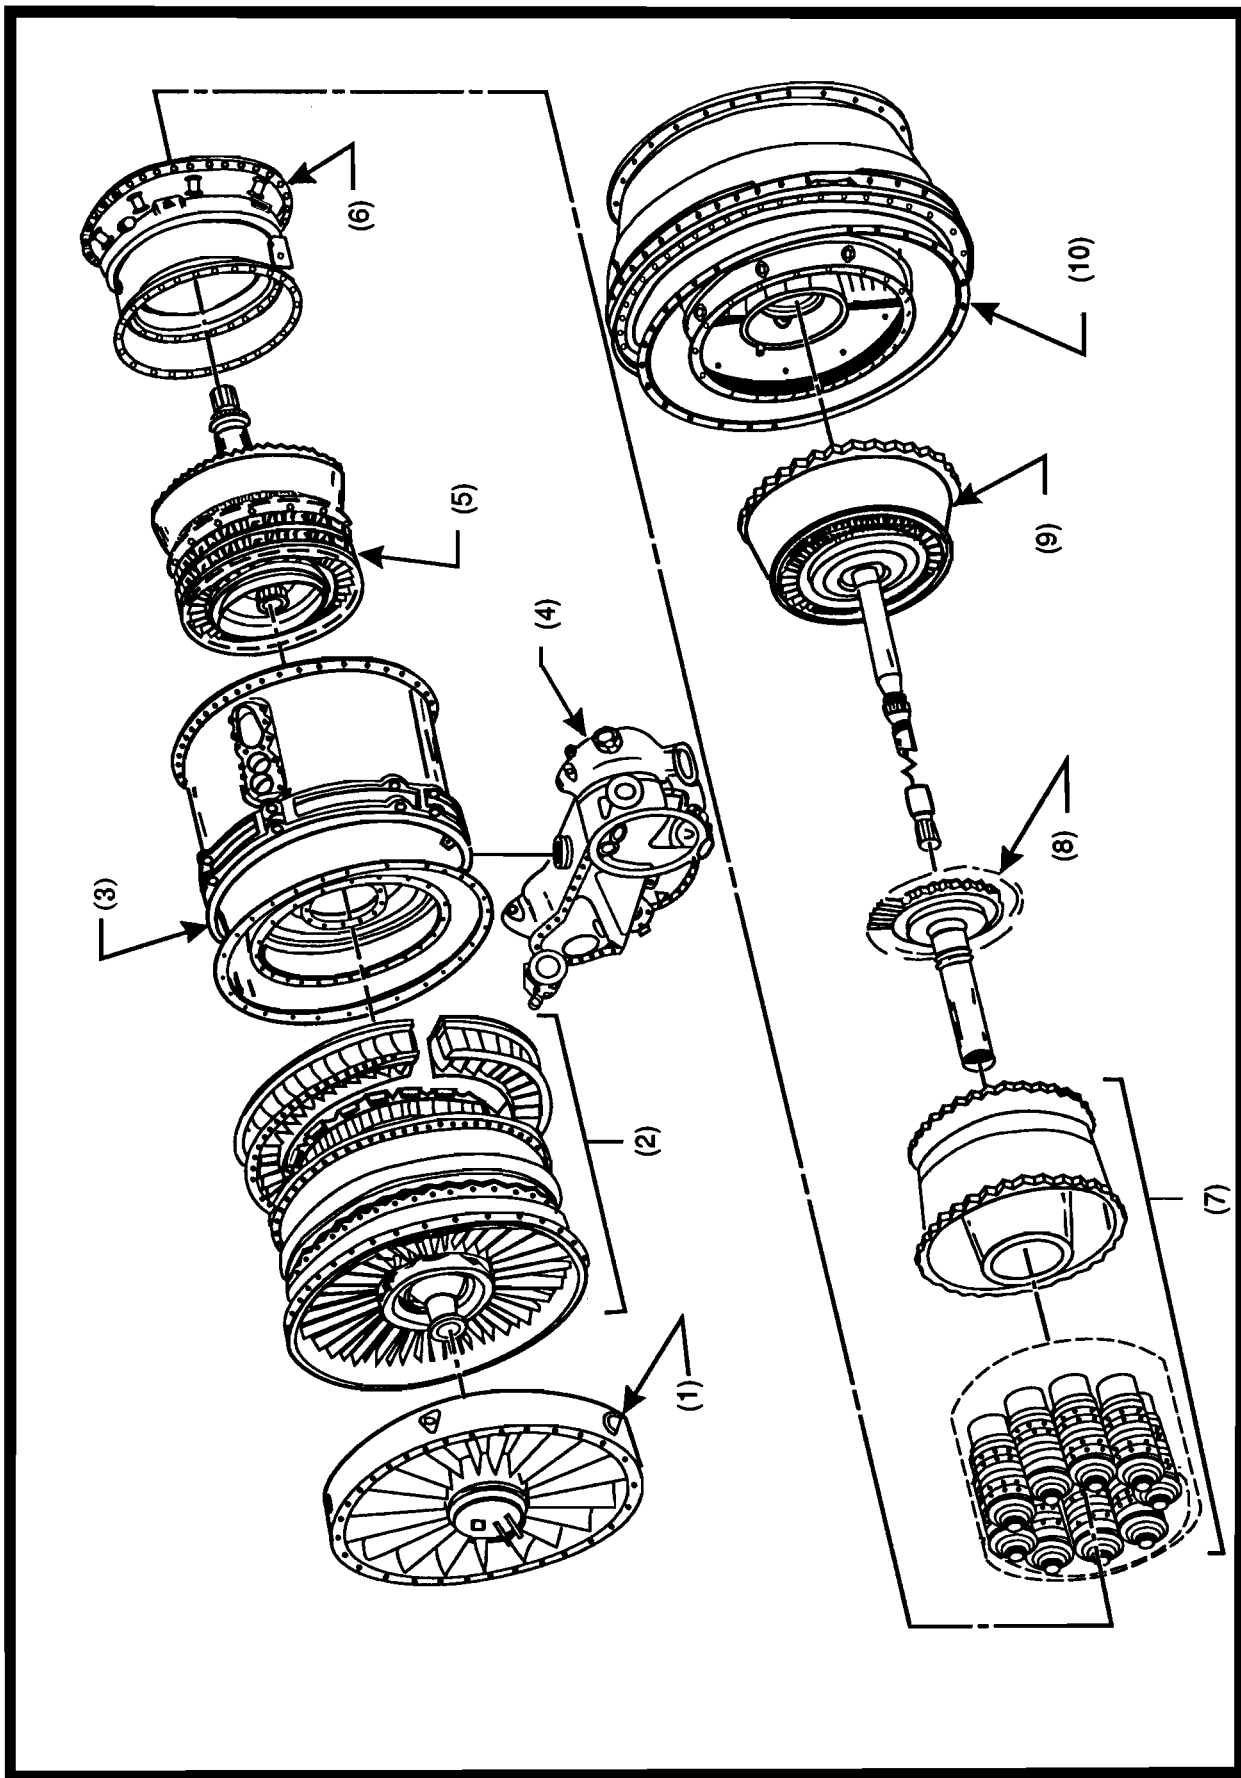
Major Subassemblies of an Axial-Flow Gas Turbine Engine.
